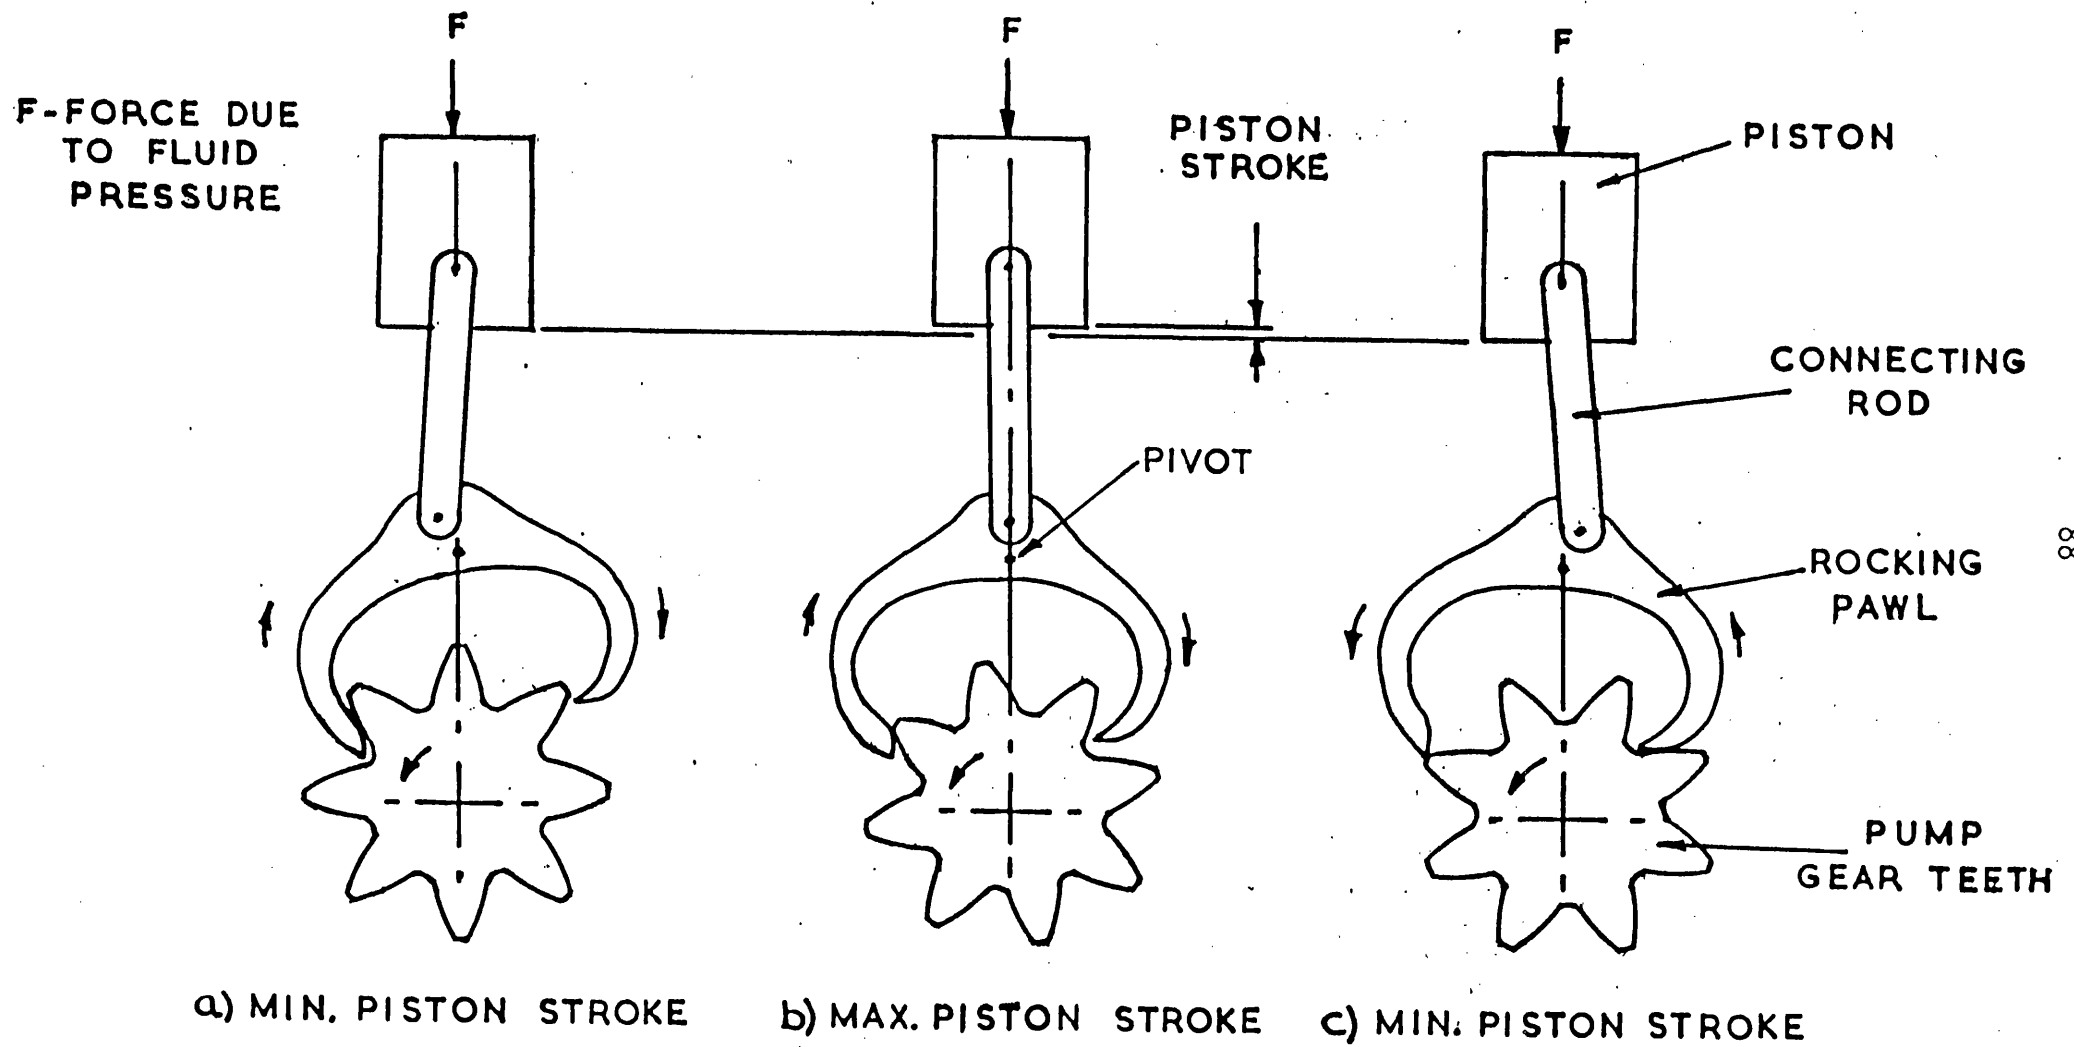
SCHEMATIC OF ROCKING PAWL MECHANISM
